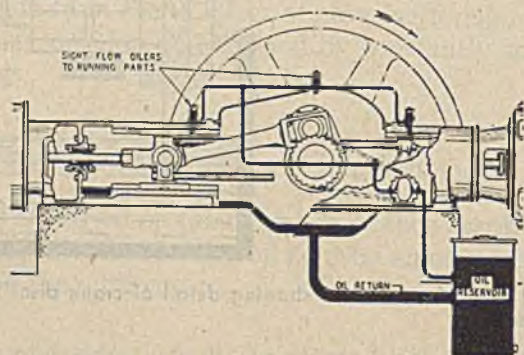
End view of crank case showing detail of crank disc "pump" lubricating system.
